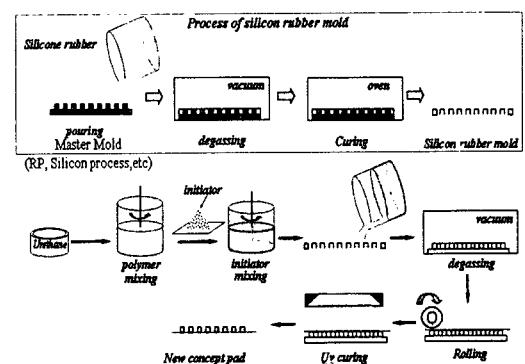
Manufacturing process of CMP pad using micro molding method.
